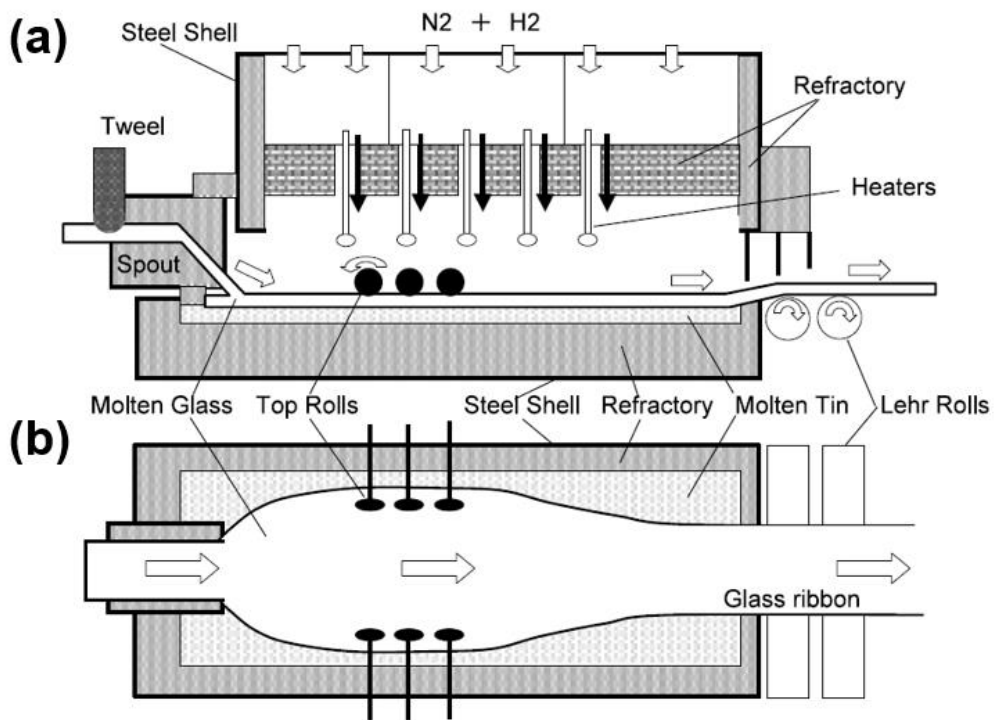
(a) Cross section and (b) Plan view of the float bath [3].
